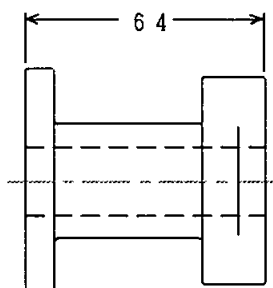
is a view of an adaptor assembly mounted on a process, and Figure 14.4 is an external view of the adaptor. Figure 14.5 shows the installation kit adaptor length. For the other dimensions, refer to the external dimensions in “1. Overview.”
